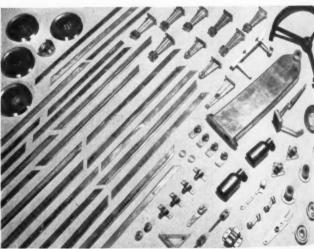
One hundred and eighteen zinc die-cast parts were used in designing the Link trainer for airplane pilots. The total would have been much larger with machined parts
